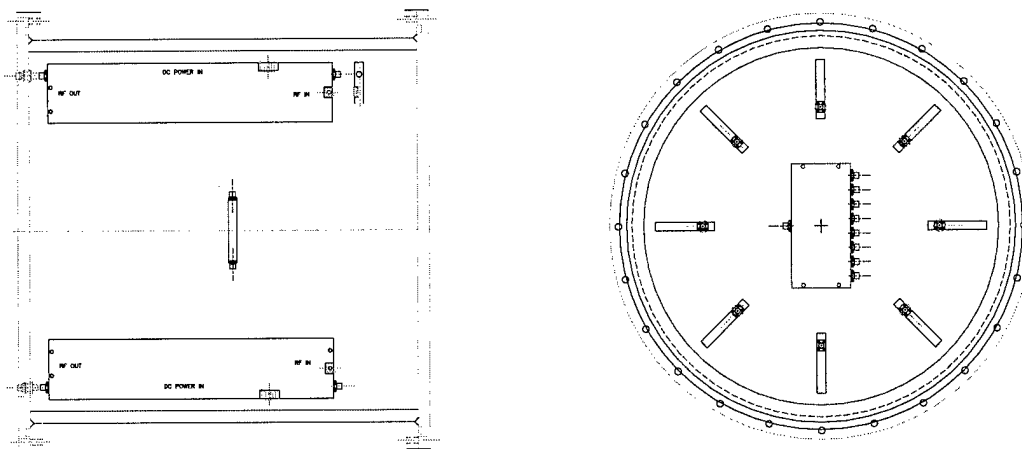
THE VACUUM CHAMBER AUTOCAD LAYOUT; SIDE & TOP VIEWS
